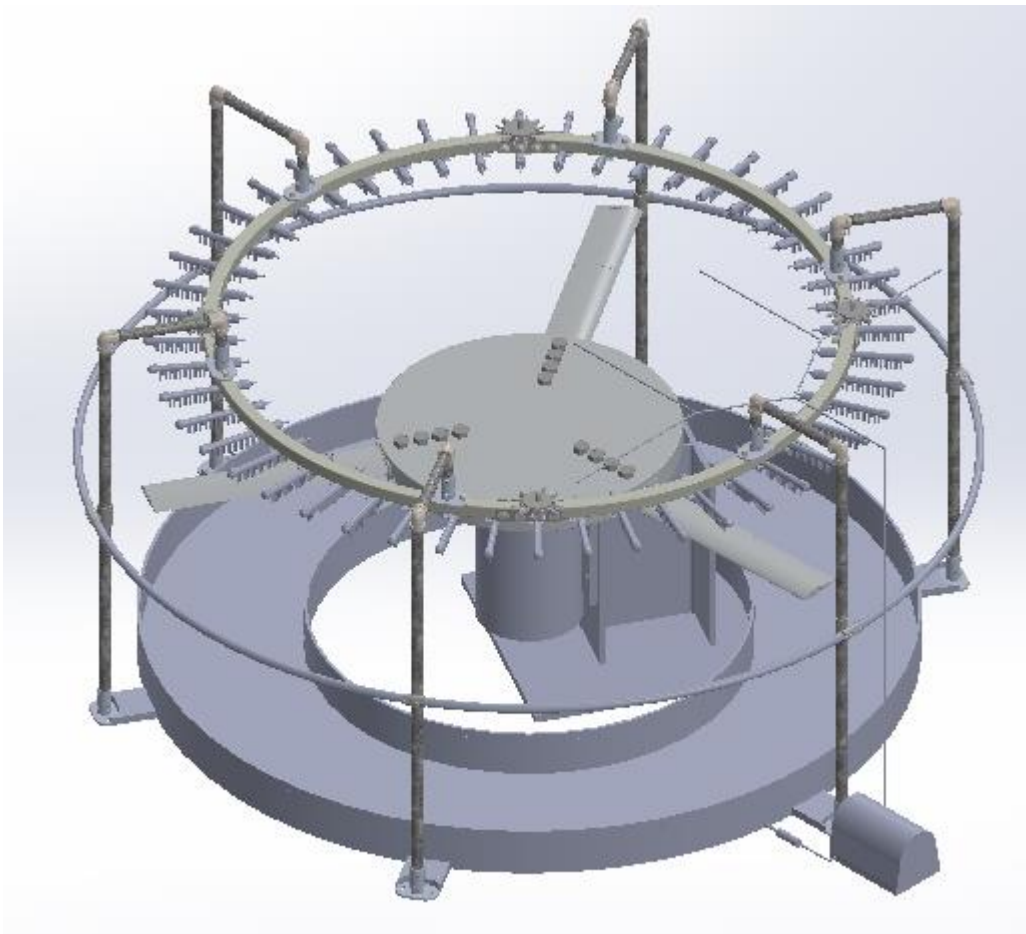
Turbine Blade Erosion Testing Unit fully assembled not including tubing stretch 2 or curtains
